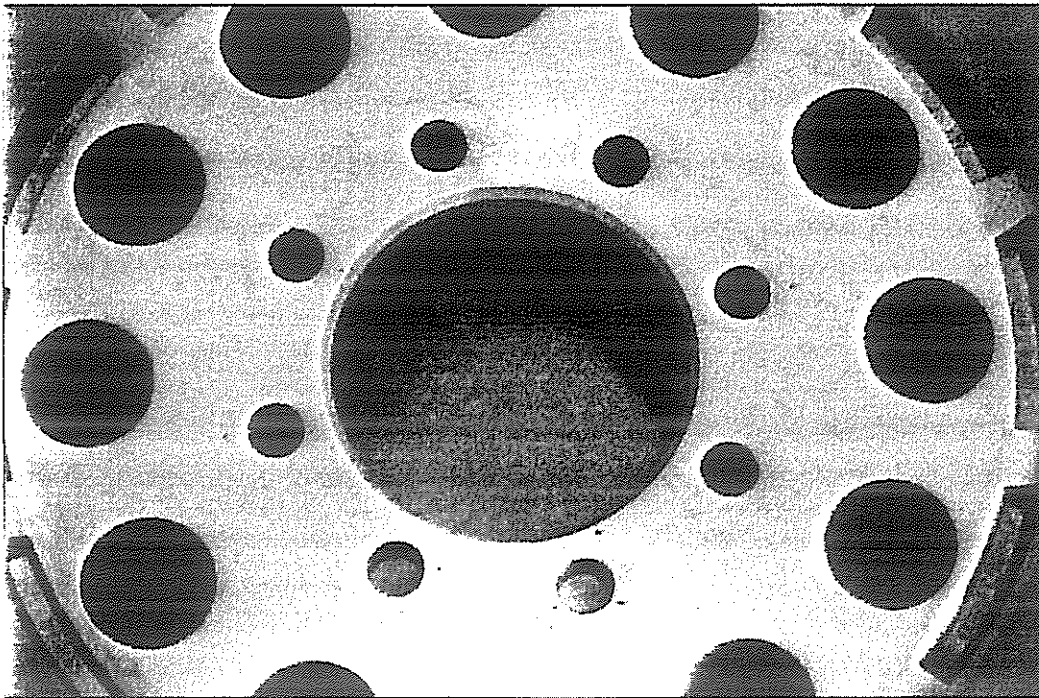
Wheel faces -- showing the apparent outline of the contact face with the rotor
